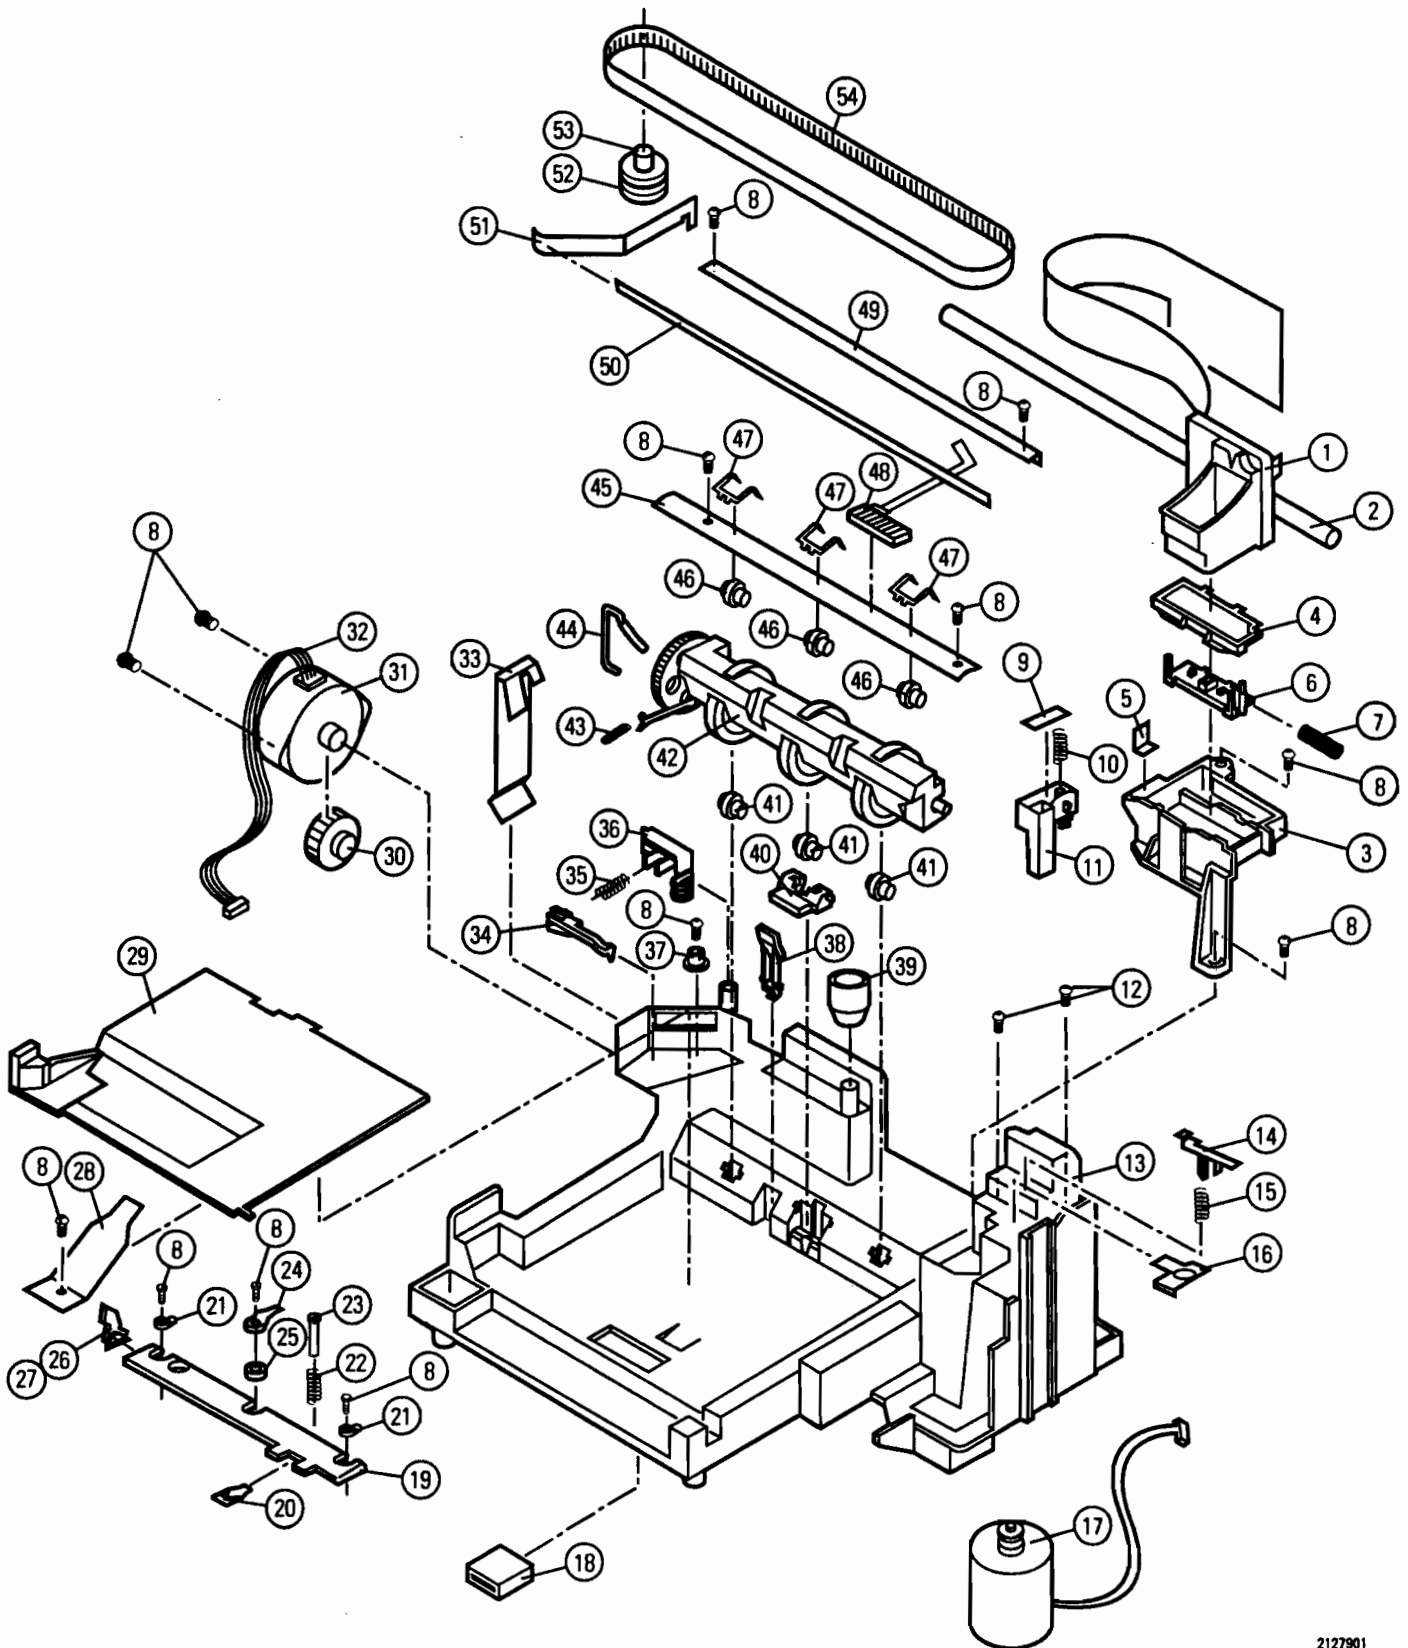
HP DeskWriter 510 Mechanism Overall View)
